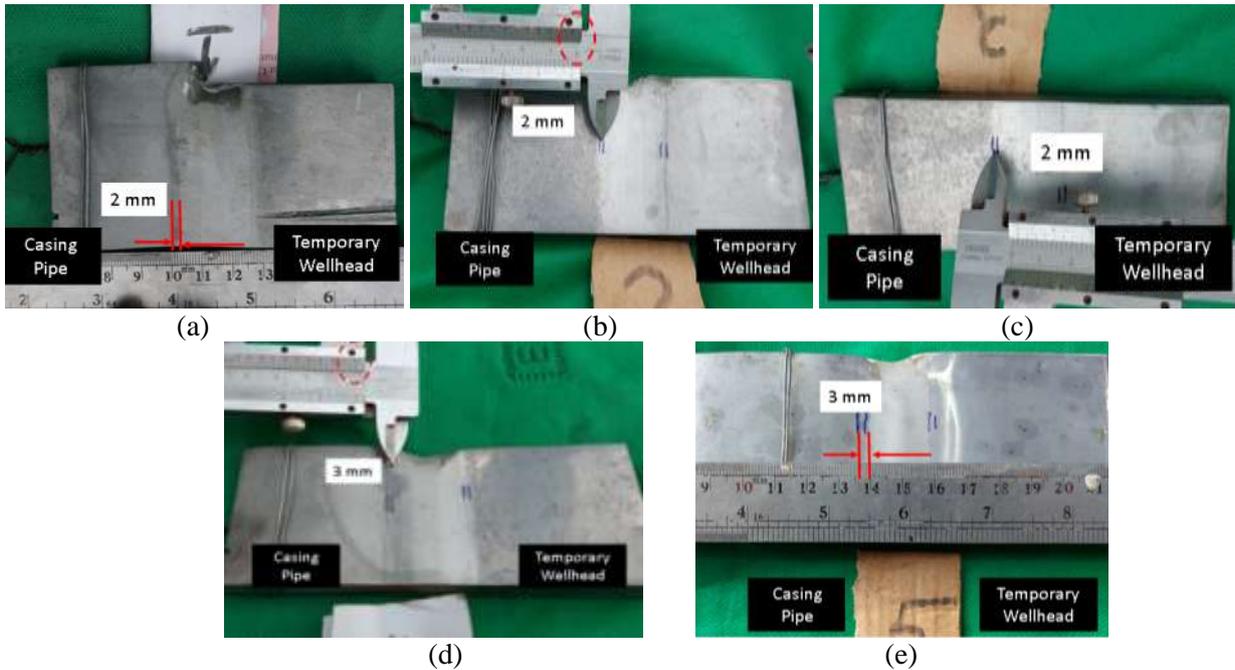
HAZ of the outer surface of (a) Specimen A, (b) Specimen B, (c) Specimen C, have the same width, 2 mm. And (d) Specimen D, (e) Specimen E have the same width are 3 mm
